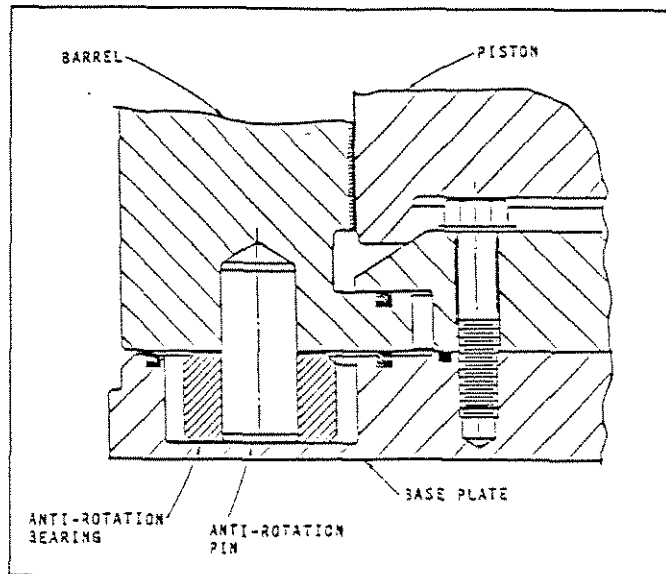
Barrel Anti-Rotation Pin & Bearing
